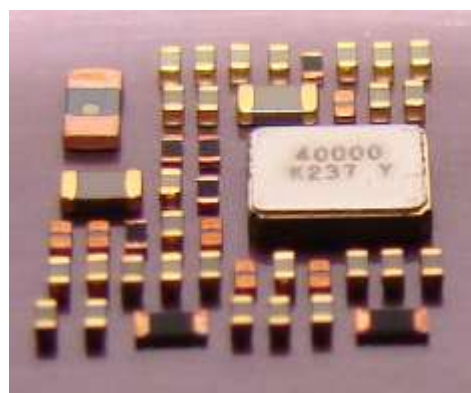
WLSiP configuration with 40+ elements placed on recon wafer carrier before wafer molding (8.1x8.1mm² package replacing current 5x larger PCB based solution)
